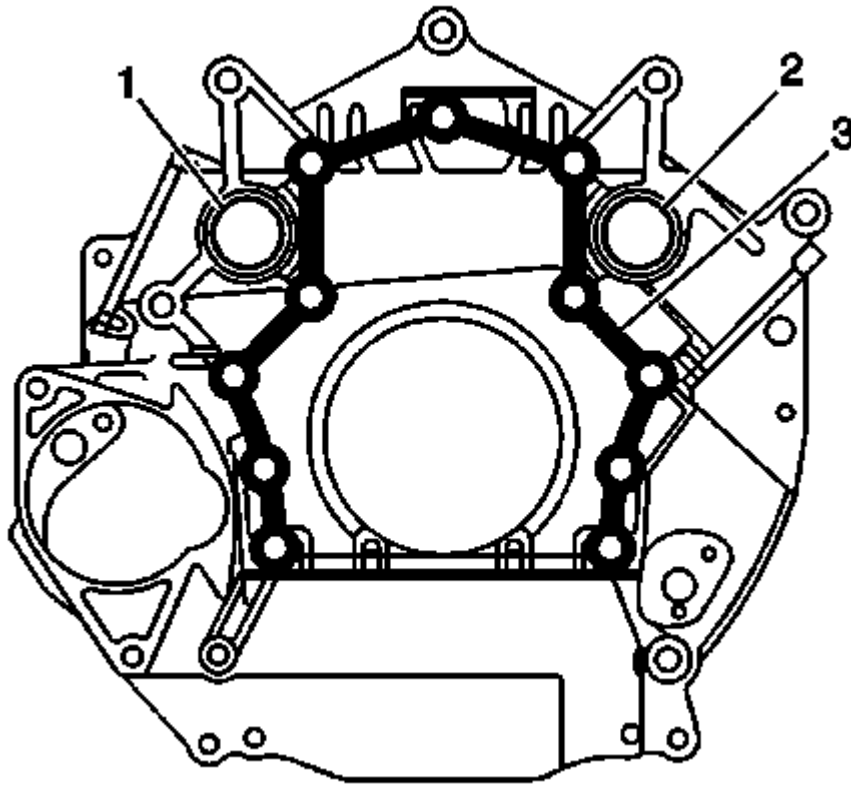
View Of Engine Rear Cover Sealing Surfaces Sealant Application Area
